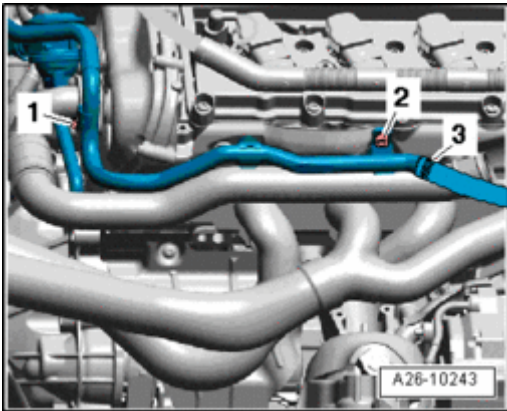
Identifying Secondary Air Injection Combination Valves Air Guide Hose & Bolts
